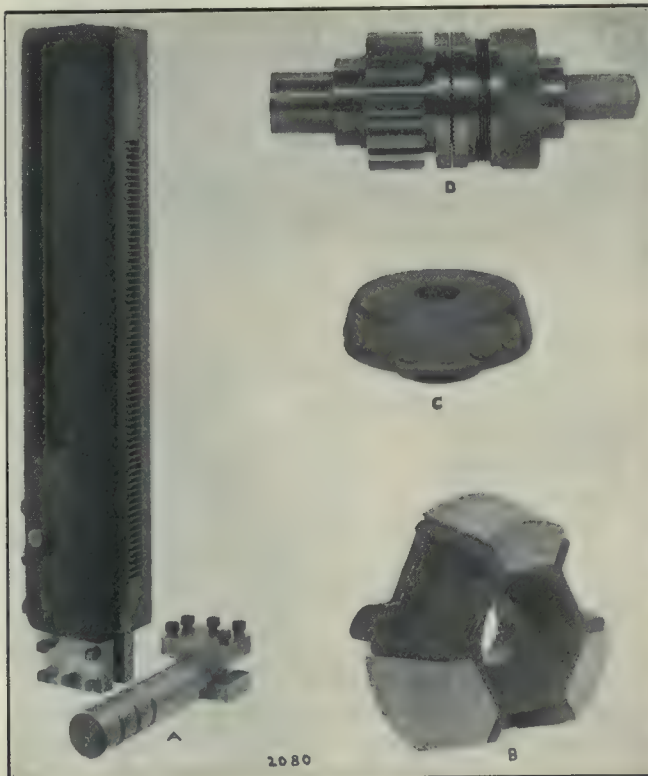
Details of New Model Boring and Turning Mills, Colburn Machine Tool Co.
